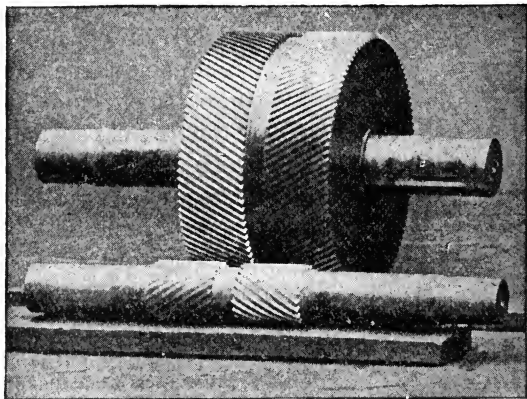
,396.—Westinghouse, impulse type single wheel turbine reduction gear and pinion; made from carbon steel forgings. The gears are of the split helical or herringbone type.
